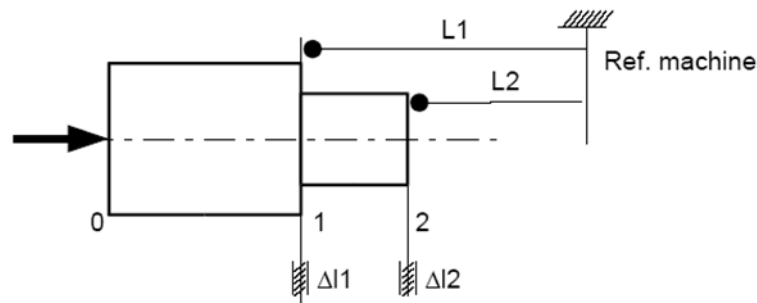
Measurements of machined surfaces inside the machine tool
